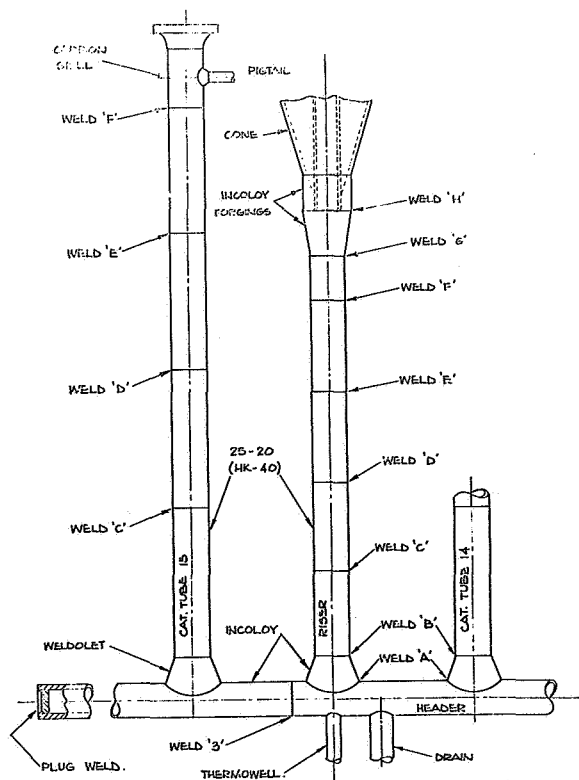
PRIMARY REFORMER, RISER & CATALYST TUBE WELD IDENTIFICATION.
